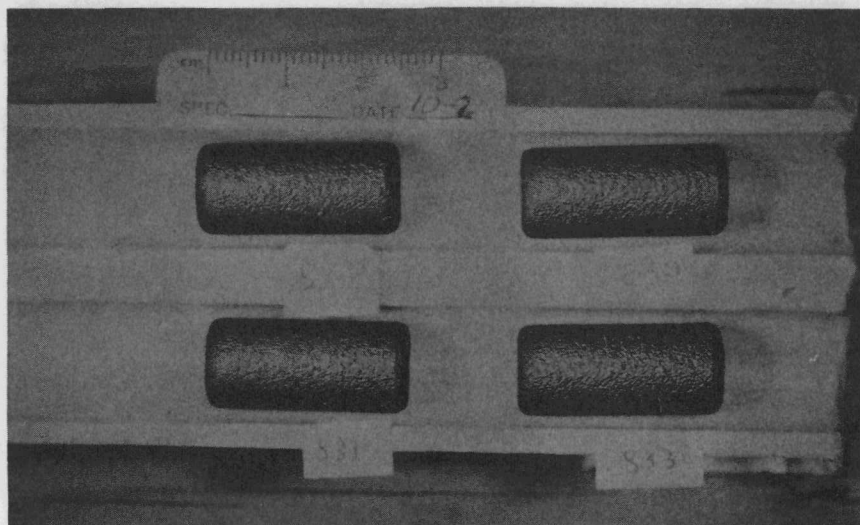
Four typical injection-molded fuel rods 1.0-in. long fabricated for proof test element No. 2
